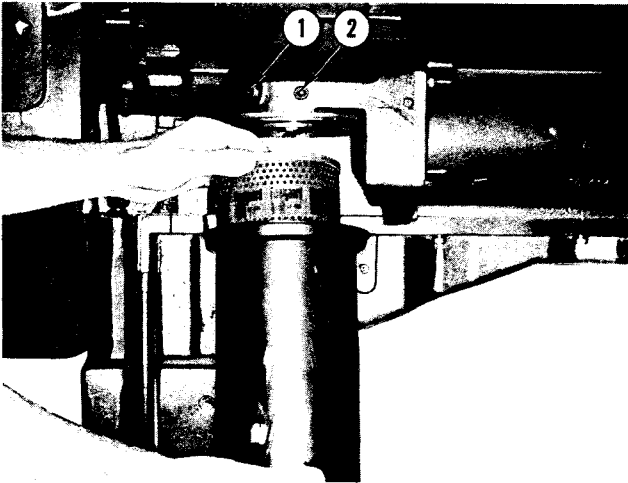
(V51908) Removing lubricating oil filter element V-903
